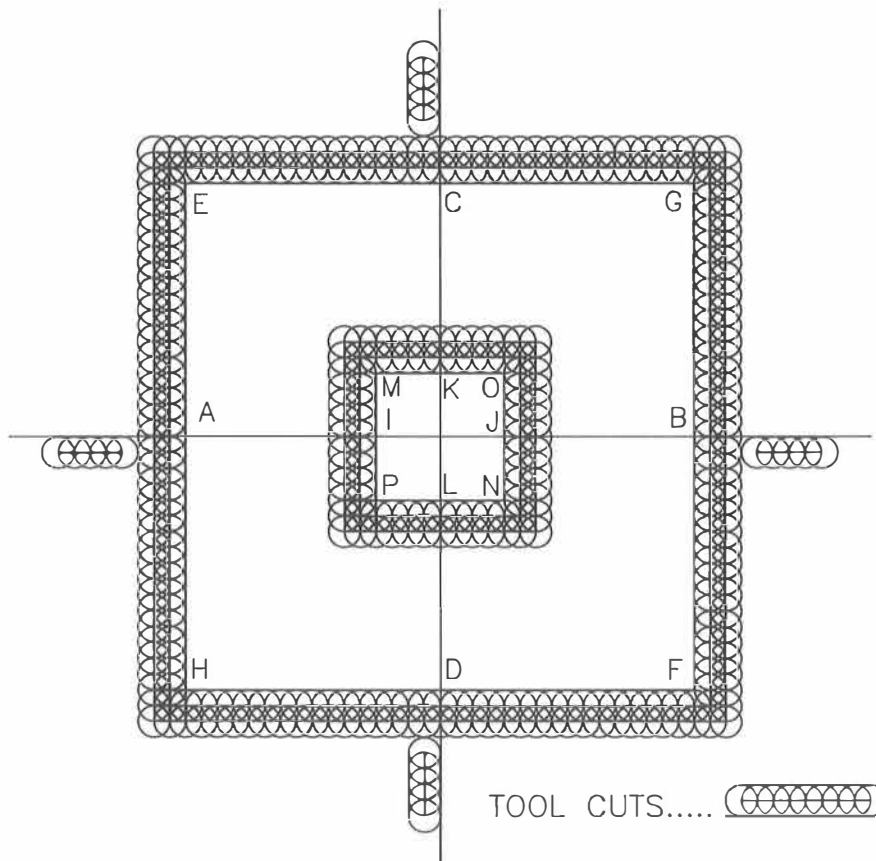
Drawing showing accuracy cuts in specified raw material and measurement points for both the 2-inch and 8-inch squares.
